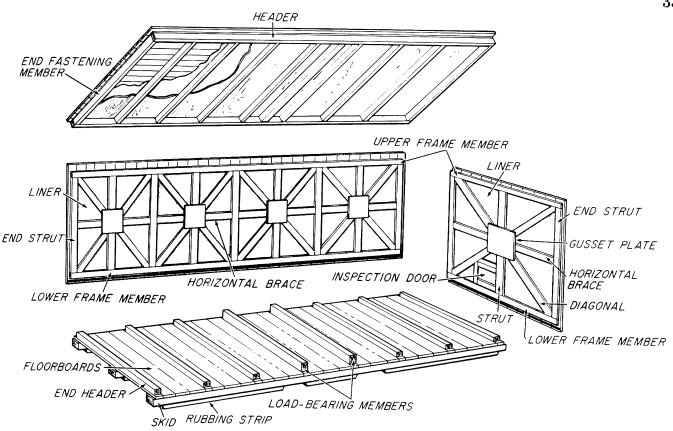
Exploded view of a lumber-sheathed crate designed for assembly with lag screws.
